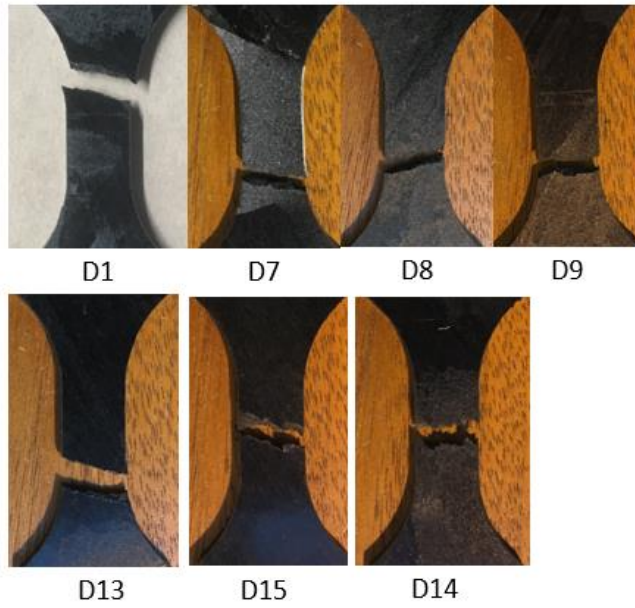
Fracture specimens for 30° coupons at R=-1.
